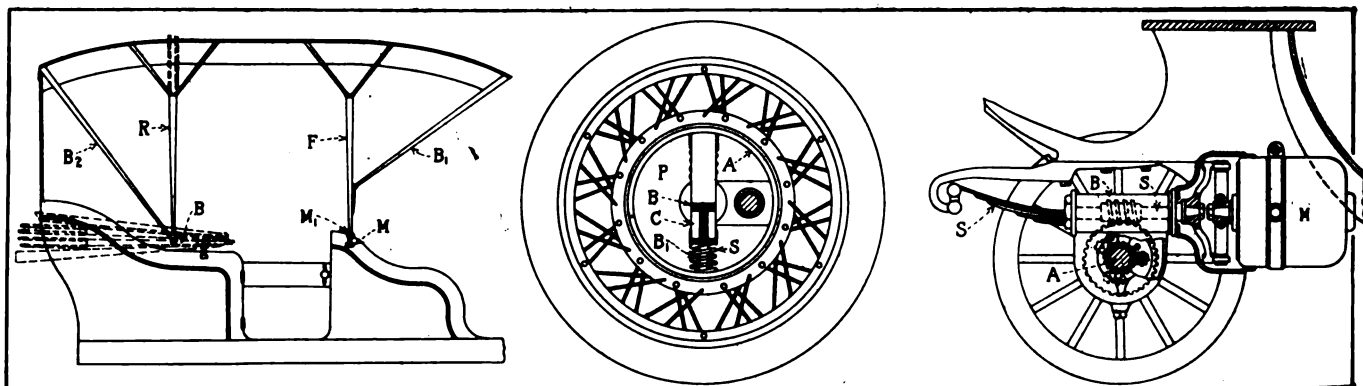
Bair automobile top. Fig. 2—Kennedy shock-absorbing wheel. Fig. 3—Douglas drive gear for electric
